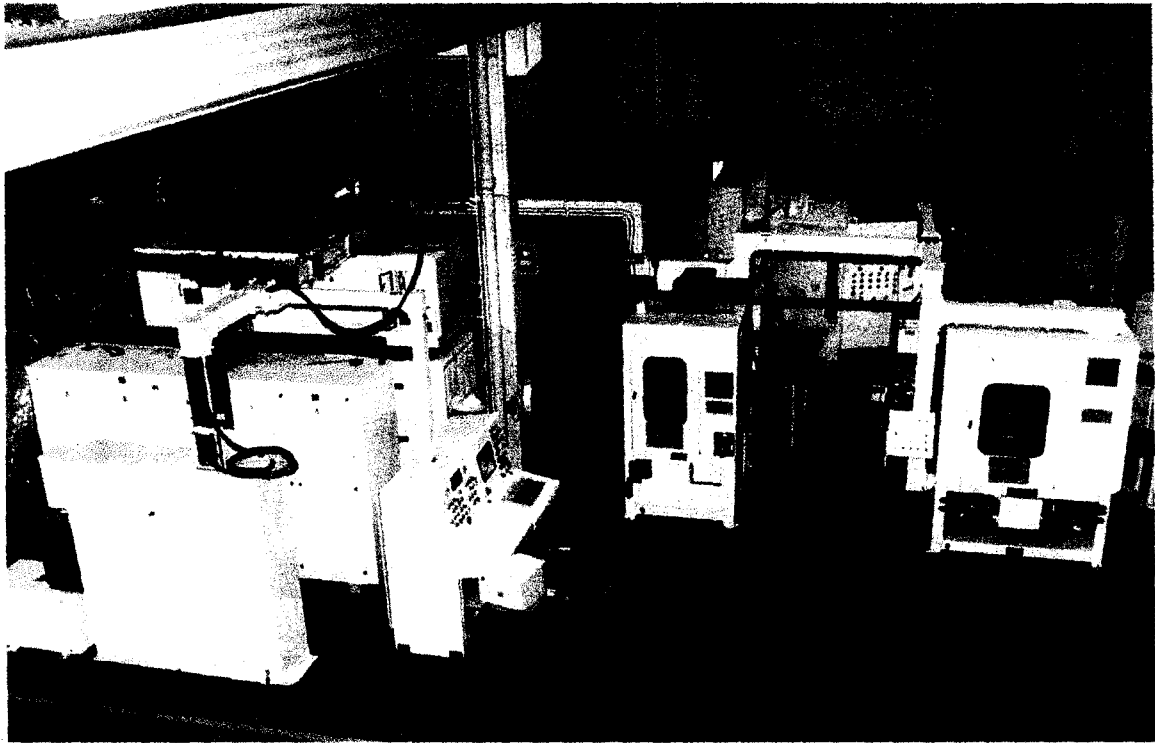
A—Production Welding System for Automotive Transmission Components
